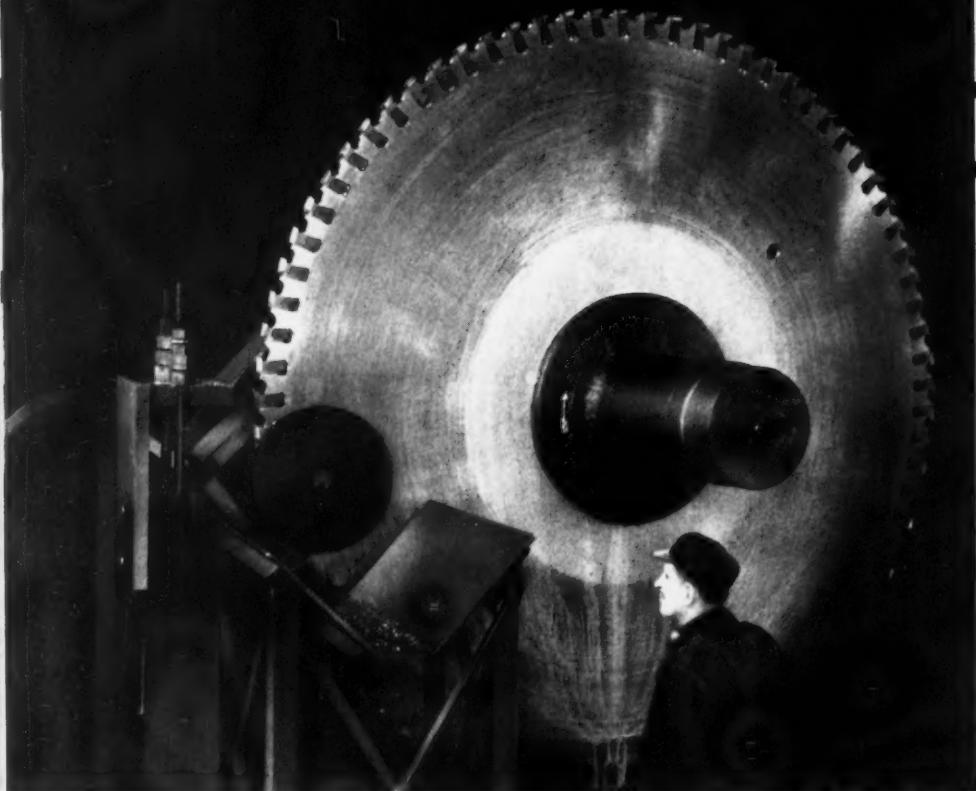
(Left) Close-up View of the 10-foot Diameter Saw Blade of the Cold Sawing Machine Shown in Fig. 4
